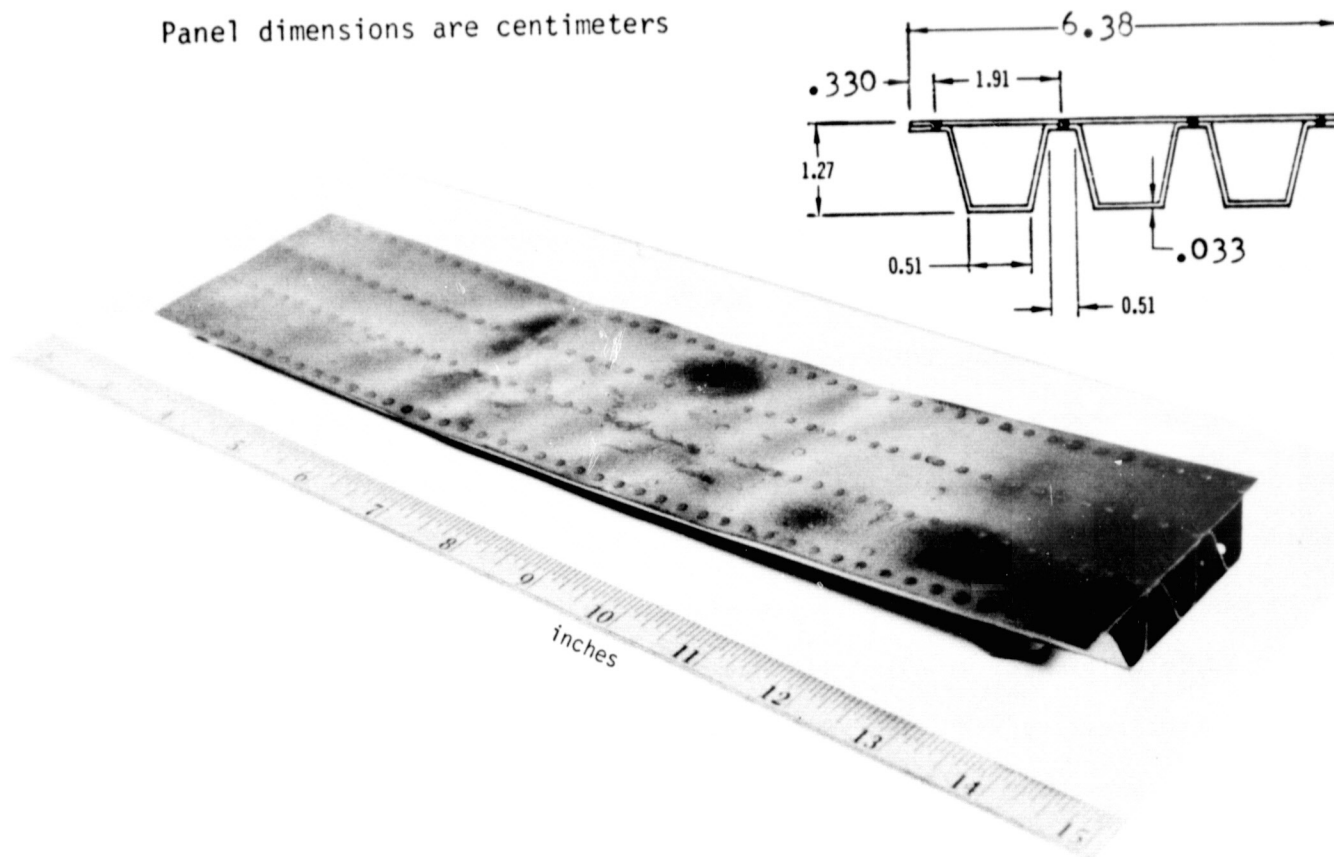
SUBSIZE PANEL T2 CROSS SECTION AND PHOTOGRAPH AFTER TEST
